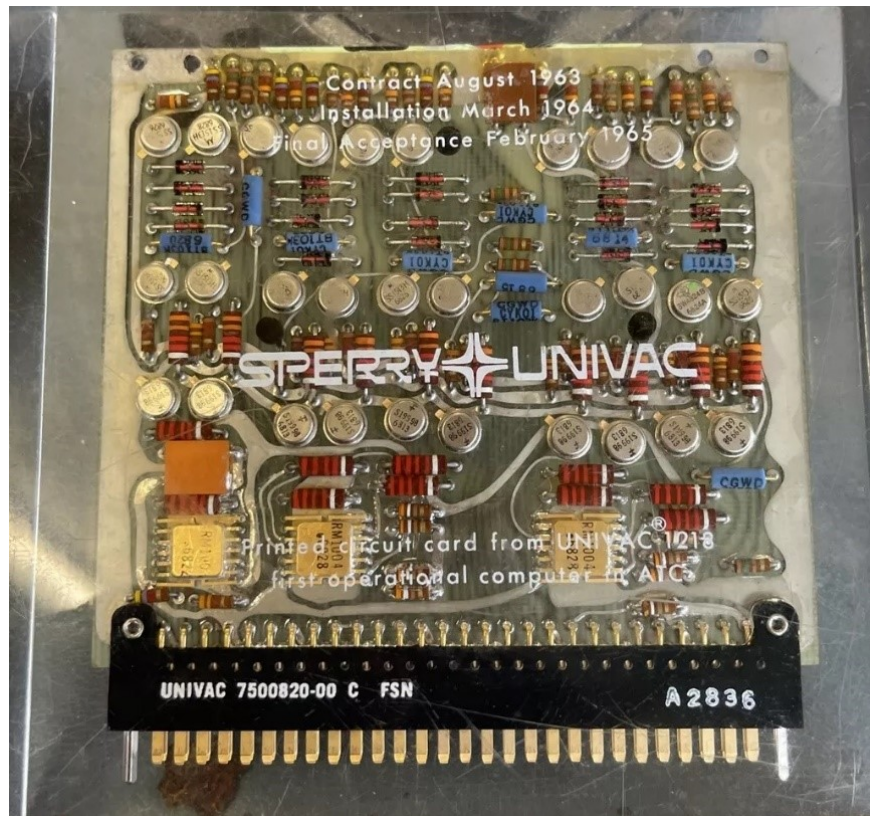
Component side of circuit card assembly (CCA) extracted from eBay figure 1 above.
